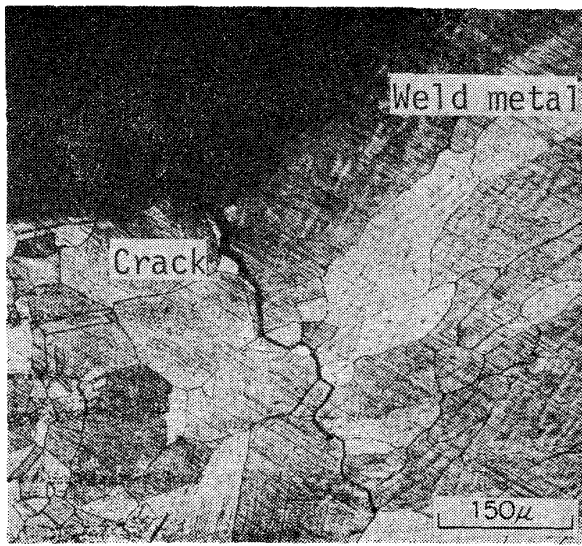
Typical reheat cracking in welded Inconel 702.
